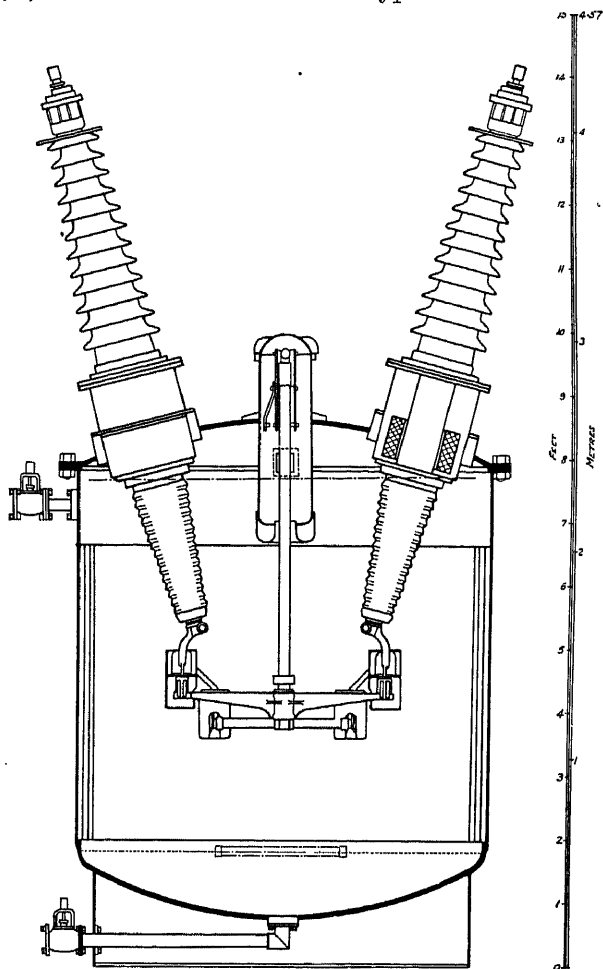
Cross section of outdoor type circuit breaker for 132 kV and 1500000 kVA breaking capacity.—Four breaks per phase (Arcing contacts being distinct from load current carrying contacts)—Welded steel tank and top plate to withstand hydraulic test pressure of 200 lbs./sq.in. (14 kg/cm²)—Condenser type bushings.
